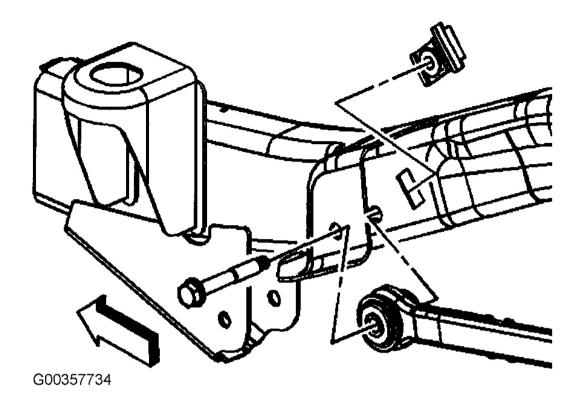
Removing Upper Control Arm Retaining Nut & Bolt From Frame Bracket Courtesy of GENERAL MOTORS CORP.
